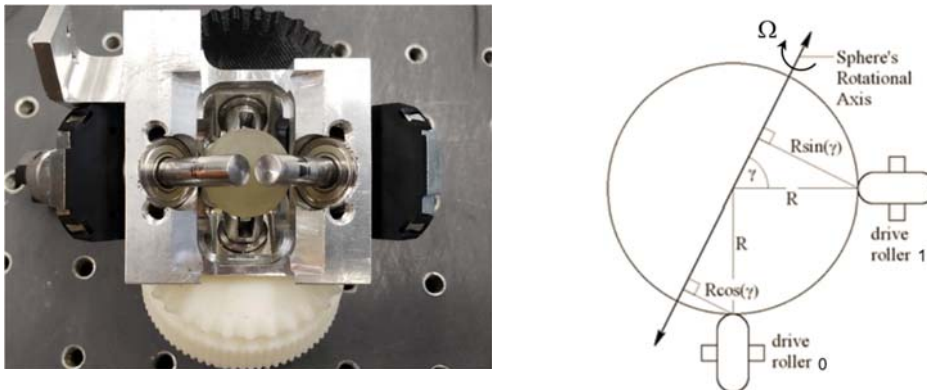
Left: SCVT with 0.5 in. sphere, drive roller shafts and steering roller gears. Right: Plane of the SCVT rotational axis which contains sphere's center and the contact points between sphere and drive rollers.
